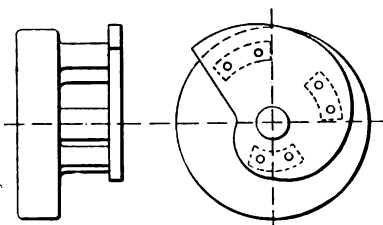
METHOD OF ATTACHING FACE CAM TO GEAR
